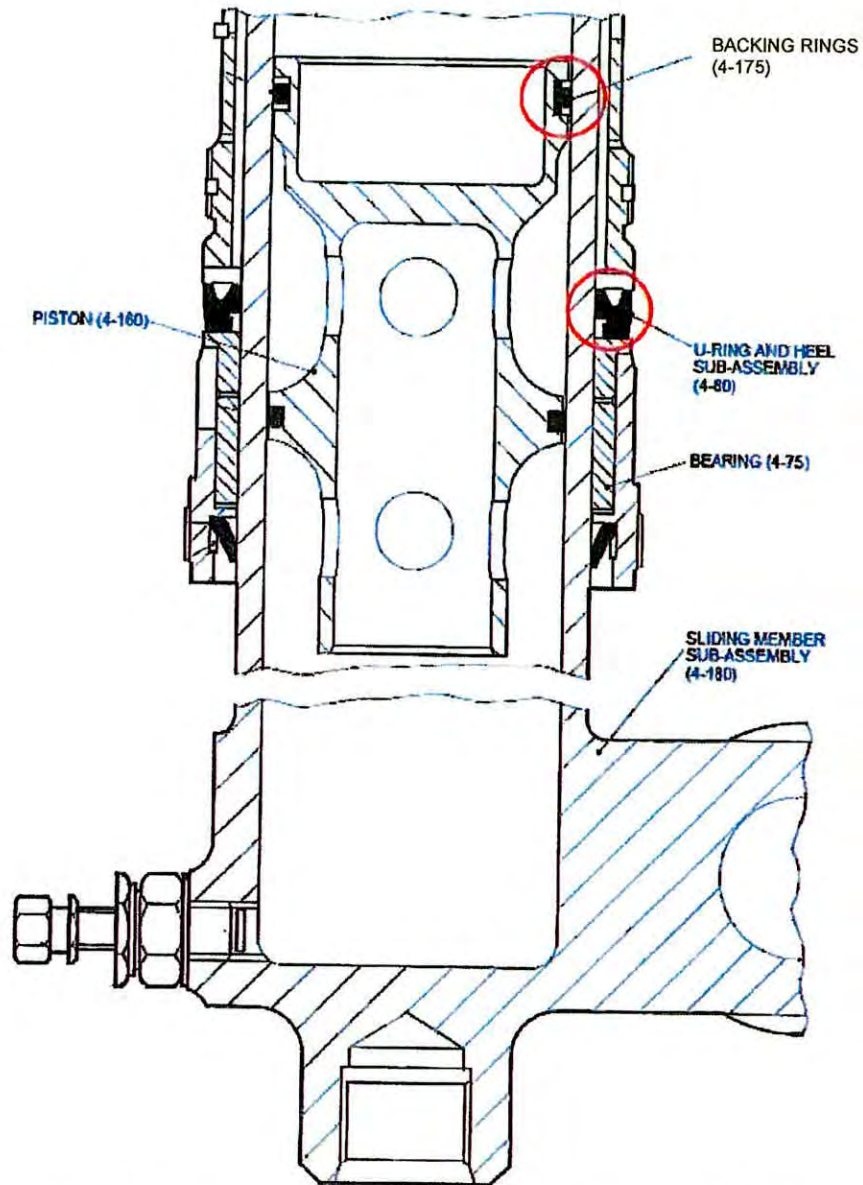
DIAGRAM HIGHLIGHTING POSITION OF INCORRECTLY INSTALLED SEALS WITHIN THE SLIDING MEMBER SUB-ASSEMBLY
